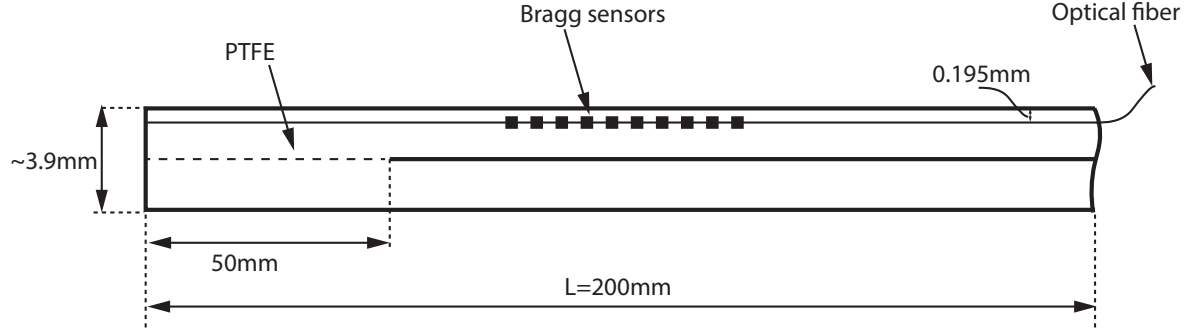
Schematic layout of a specimen with embedded optical fiber
